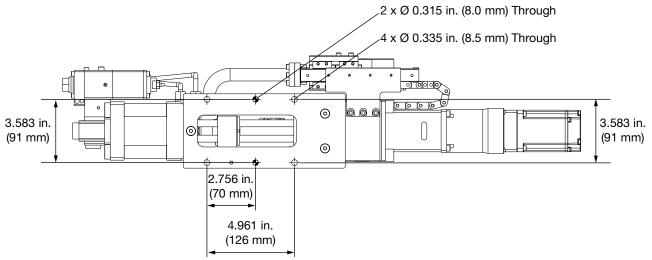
Mounting Hole Dimensions for Installing the PSM Metering Unit - 100cc
